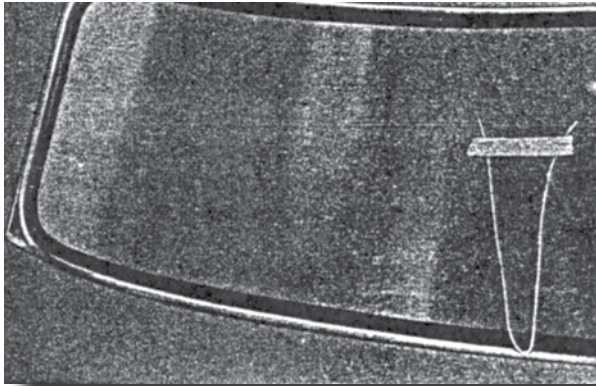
Cord in Pinch.Weld Cavity
